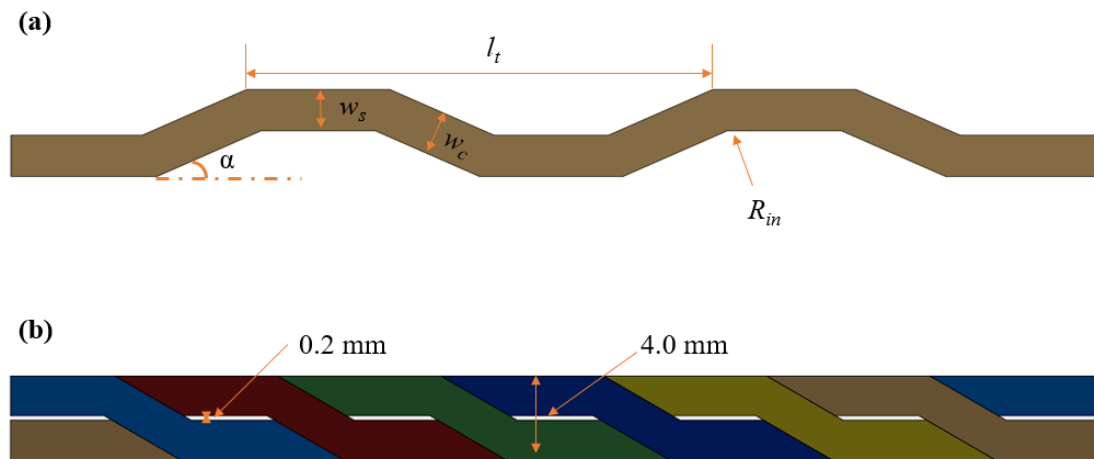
(a) A REBCO Roebel cutting pattern. (b) Assembly of a REBCO Roebel cable with six strands.
